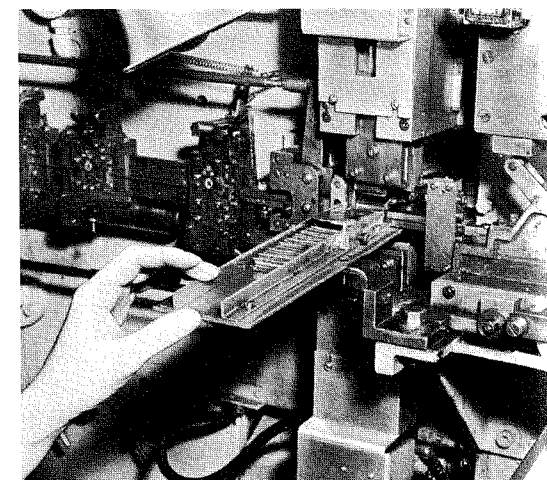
Tube Division equipment development engineers are responsible for design of this automatic grid welder. It makes grids by welding grid wires to siderods. All wires required to form the specified number of turns are pulled over two side rods, a sizing mandrel forms the ovate grid shape, and wires are welded and cut. Grids emerge onto a tray.
